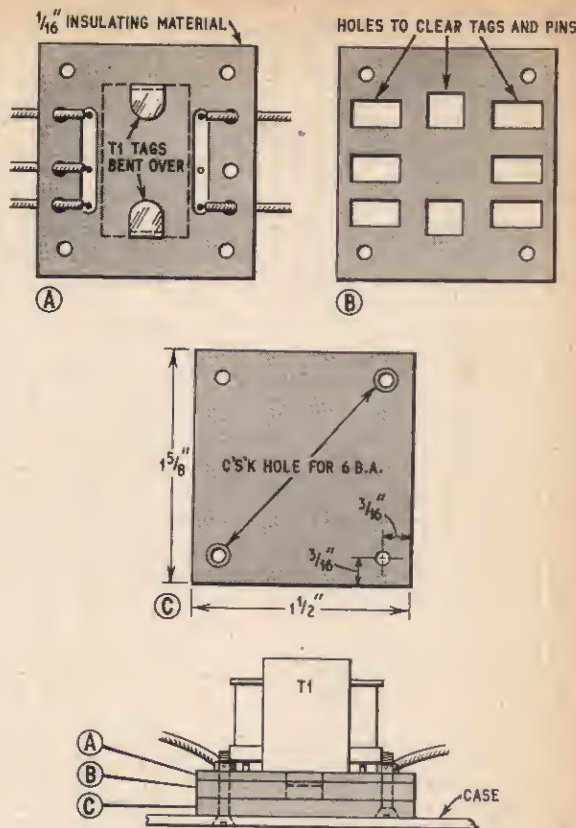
Insulated mounting for T1, holes are arranged to clear transformer tags. Sections B and C are  $\frac{1}{8}$ " in thickness Bakelite
